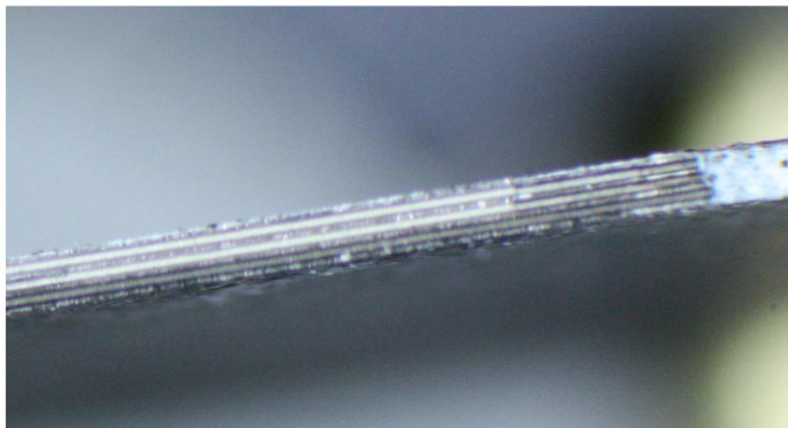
Fracture surface image of specimen 3-3
